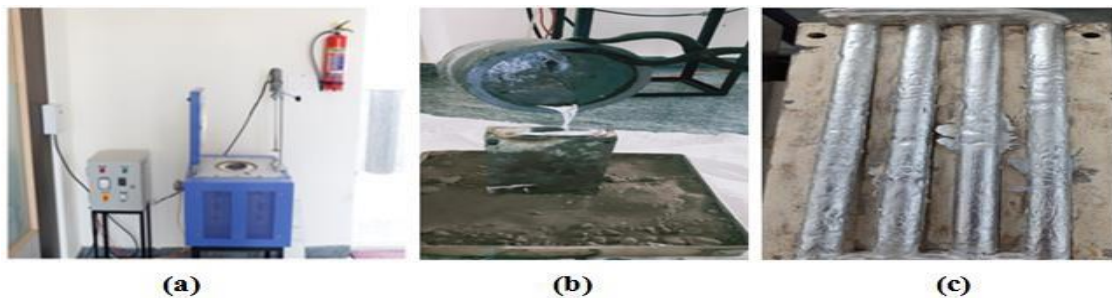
(a) Melting furnace with Stirrer (b) Pouring of molten metal in to die (c) Fabricated NMMCs
